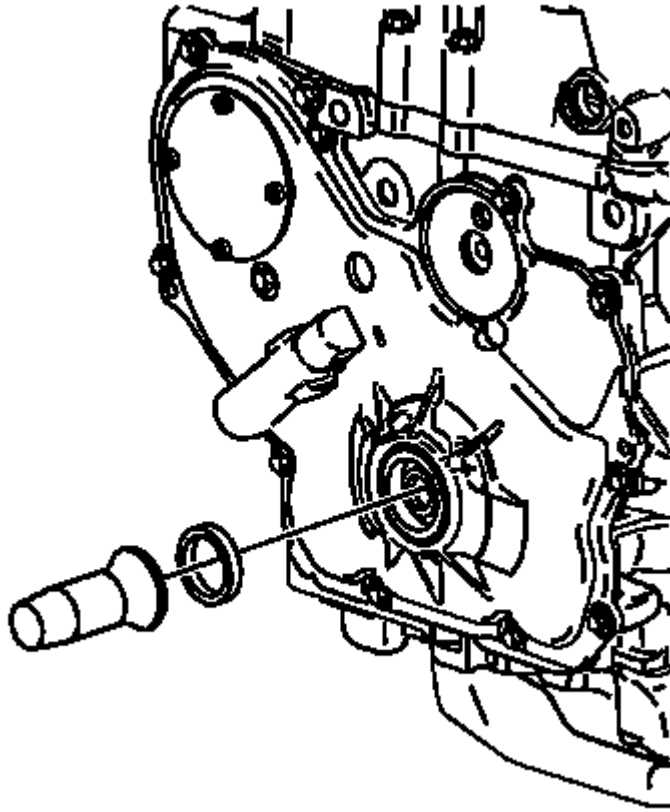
Identifying Crankshaft Front Oil Seal & Special Tool J 35268-A
